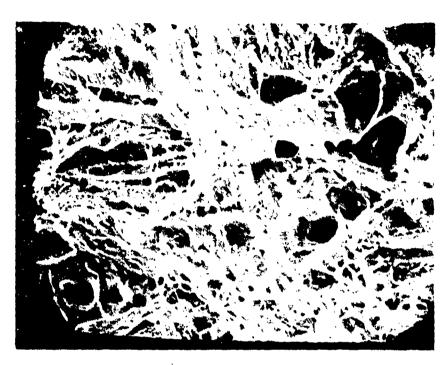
Dimple rupture in an A-516 fatigue specimen, 1000x.
